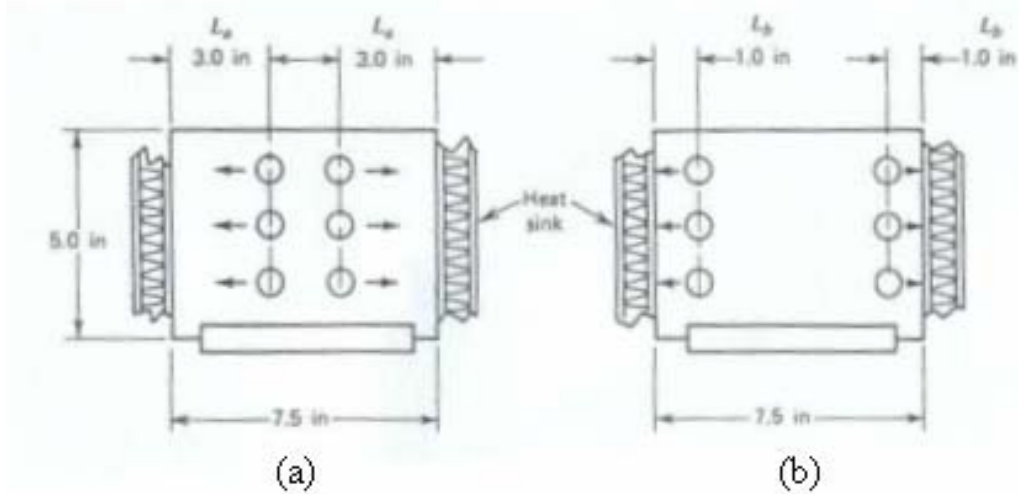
Power transistors mounted on an aluminum heat sink plate. (a) Old design (b) new design.
